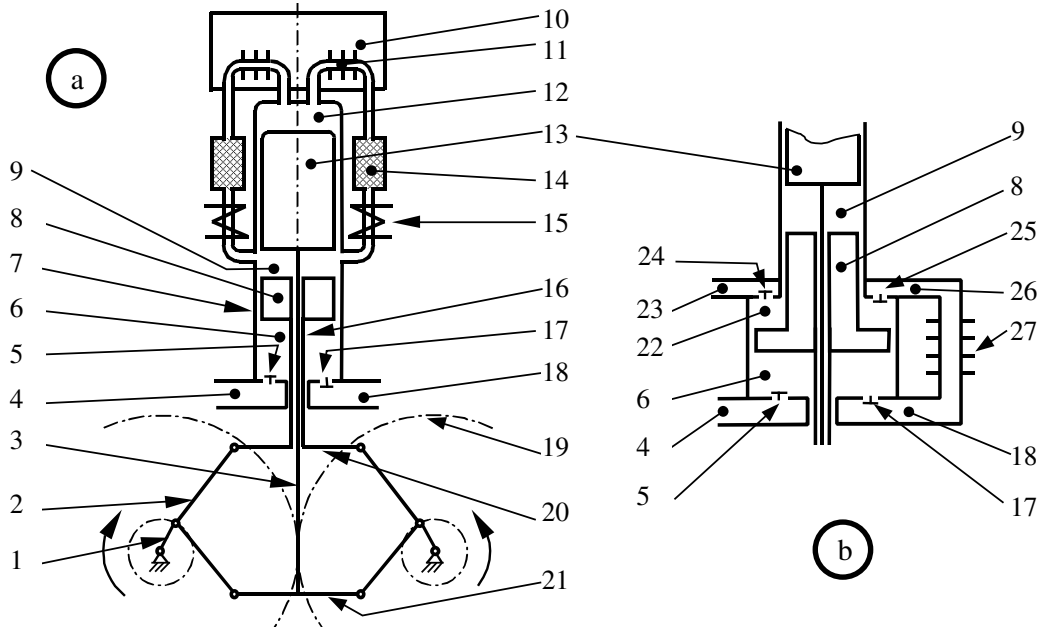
SMDC based on β arrangement: a - one-stage SMDC; b - two-stage SMDC;
